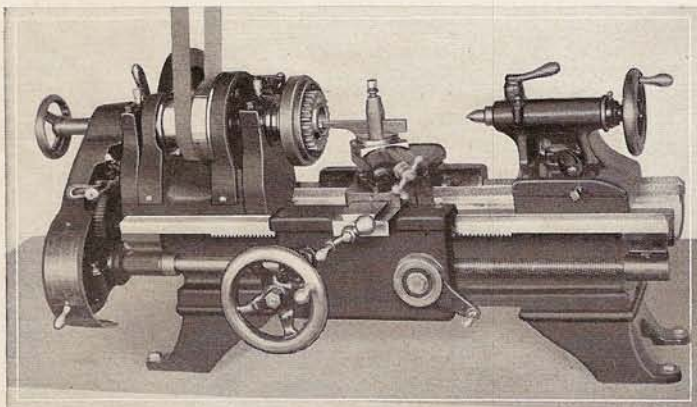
Boring a Gear on a No. 22—9-inch Junior Lathe Equipped with Draw-in Collet, Step Chuck and Closer
